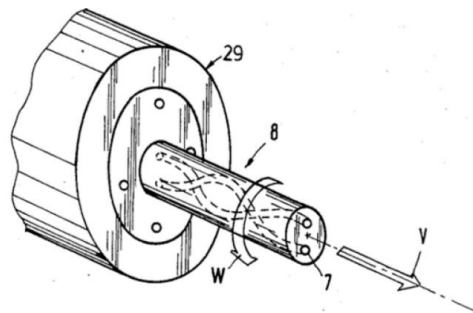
Principle of helical coolant channel extrusion [40].
